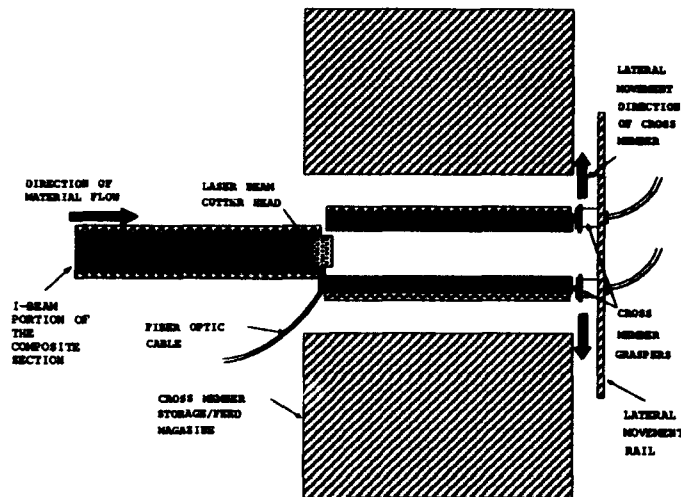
Side view of the I-beam on a composite section being driven through a side mounted laser beam cut head. In this particular illustration, the resulting T-beams are being cross cut into 1.035 m lengths and will serve as the cross members of the truss product.
